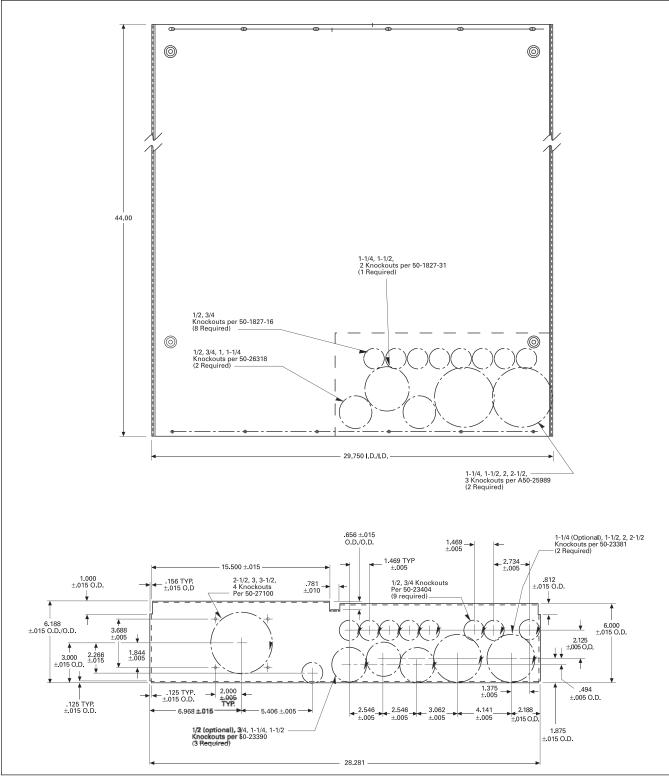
House Panel Dimensions and Knockouts — For All House Panels Except HPC40SHL and HPC30SHL
